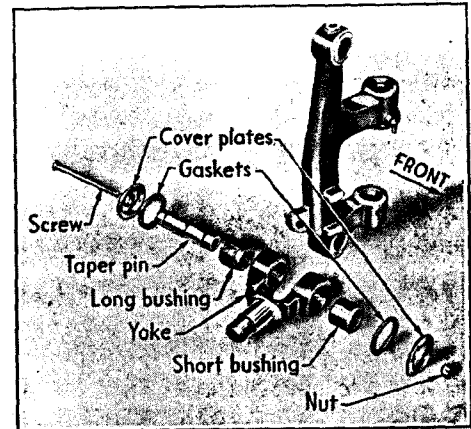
The small end of the taper pin, stamped "small end" should be inserted from the rear. Likewise, the cover plate screw should be inserted from the rear.
